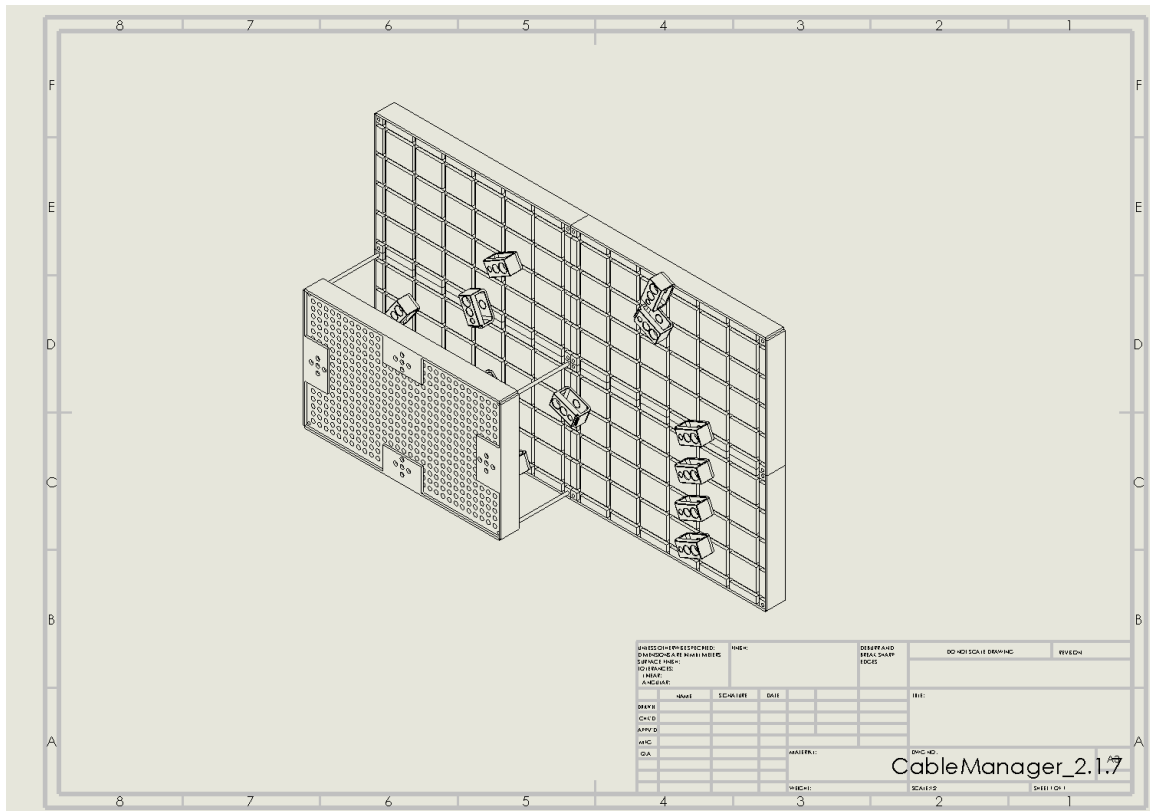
Engineering drawing of the complete LinkConnect assembly.
